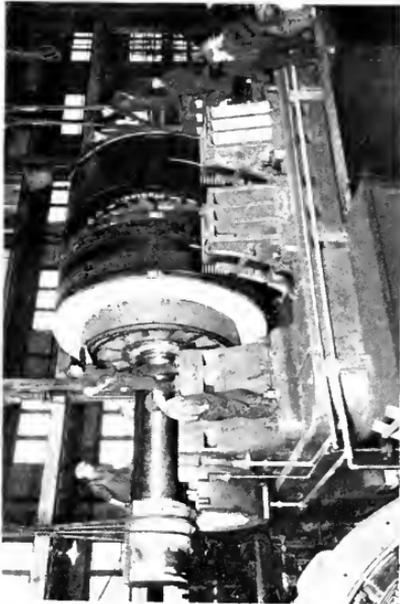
6300-h p. Steel Mill Motor in Process of Assembly in Factory
